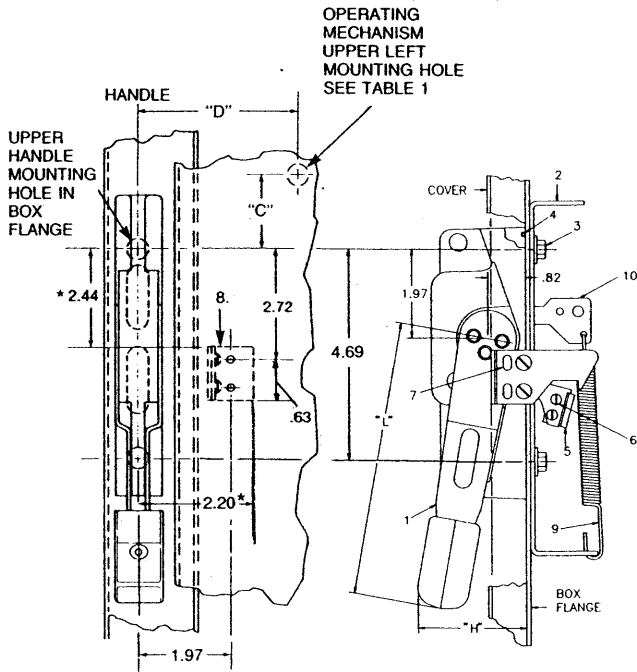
Vertical location of upper left operating mechanism mounting location relative to handle upper mounting hole.
